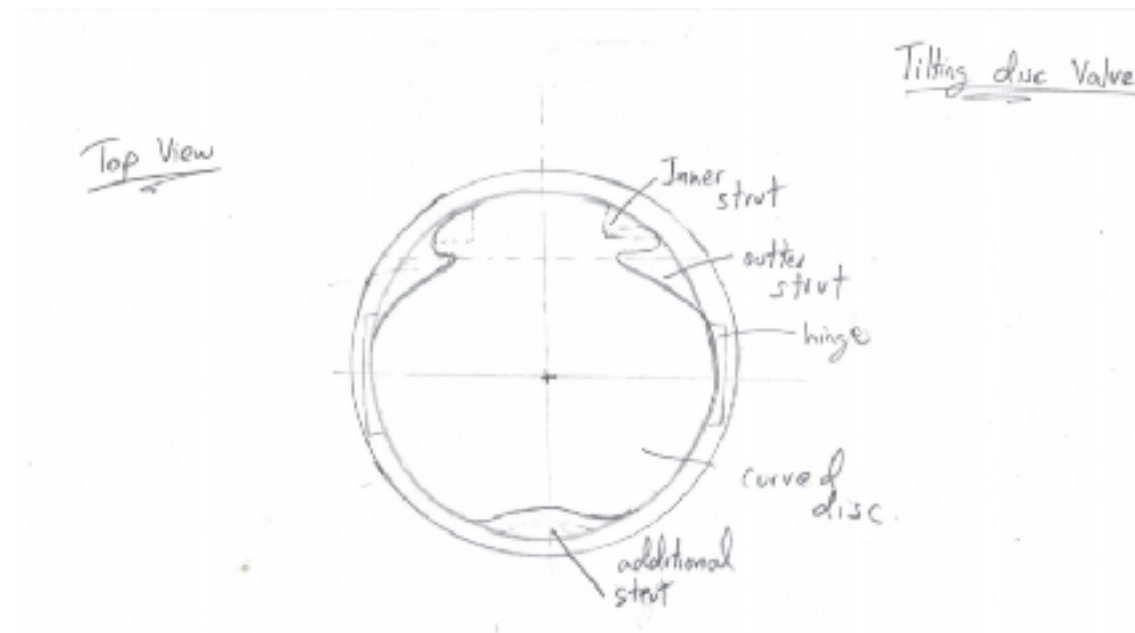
SKETCH OF TOP VIEW OF TILTING DISC VALVE
